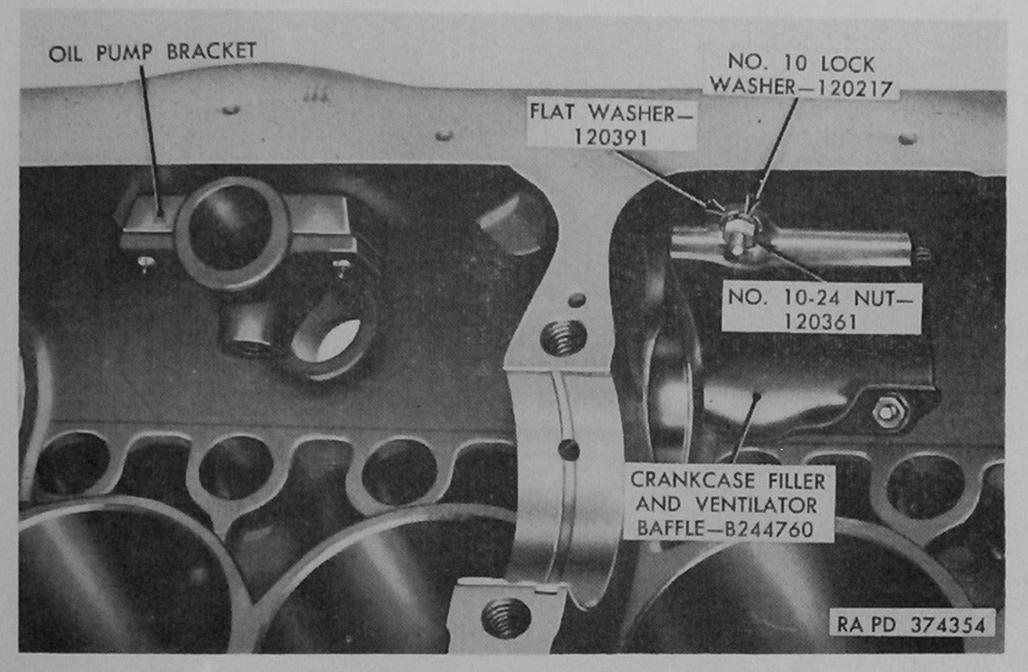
Crankcase filler and ventilator baffle installed on cylinder block.
